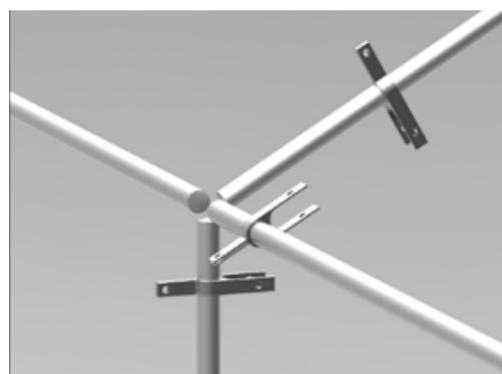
Less material is used in the redesign, making it slightly cheaper.
